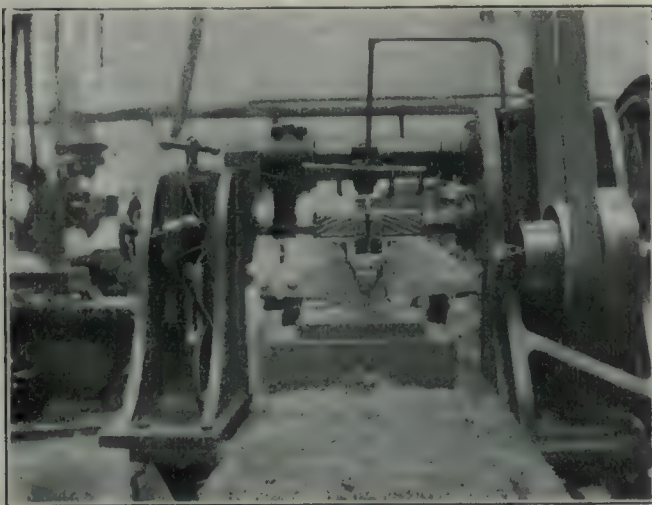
MILLING PLUMMER BLOCKS ON CRANK CASE.
